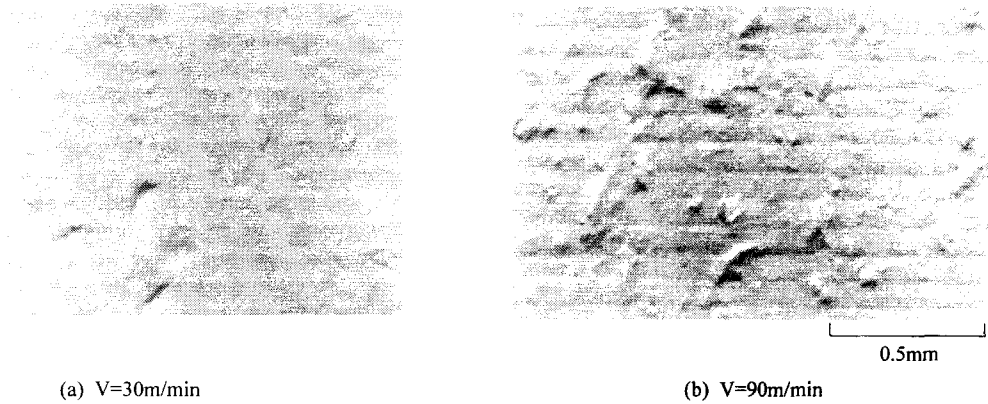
Photographs of surface turned with cermet tool at different cutting speeds
